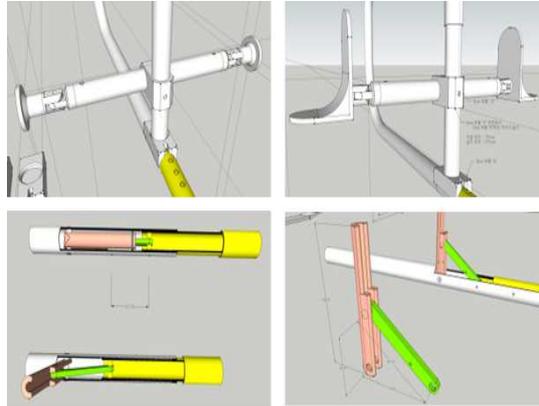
Length adjustment system for implementation of adjustment of angle and height of a boat and convenience of disassembly.
